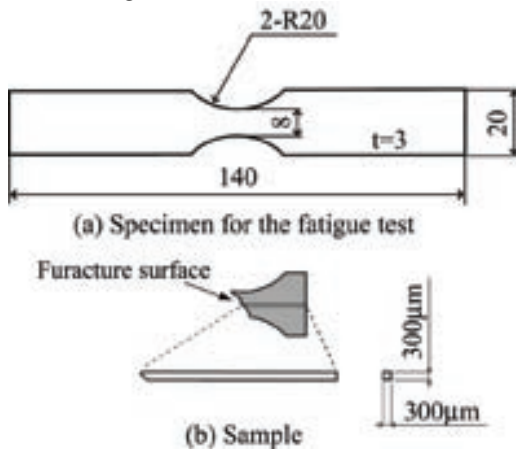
Geometry of the specimen for Fatigue test and sample for SR-CT imaging
